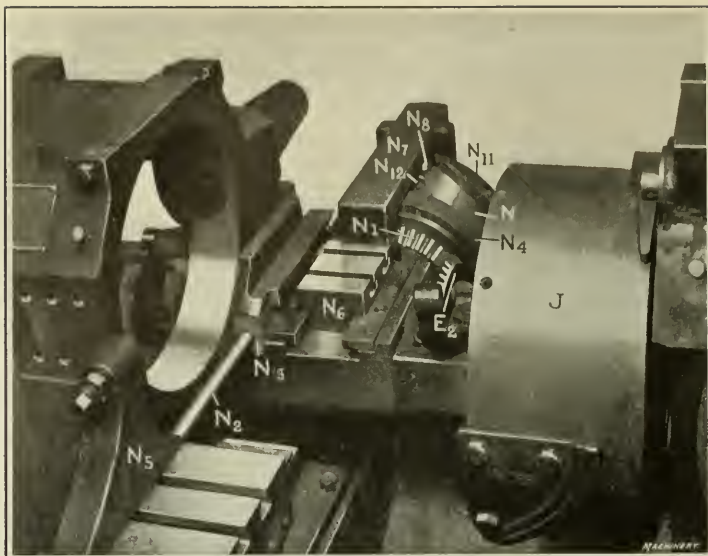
View of Machine showing Method of operating Forming and Cutting-off Slides
